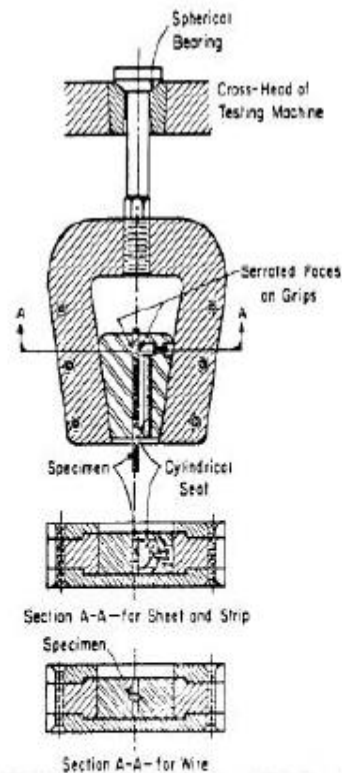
Gripping Devices for Sheet and Wire Specimens
